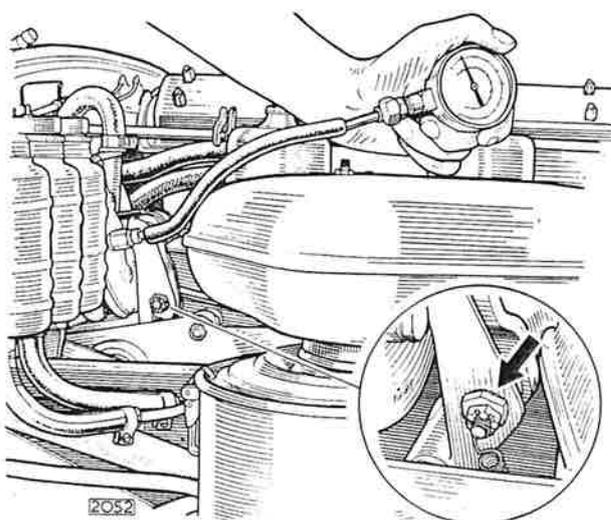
Checking the servo with a vacuum gauge, Churchill tool No. J12—Gauge and Adaptor J12/1—Pipe and Adaptor, inset shows eccentric adjusting nut
